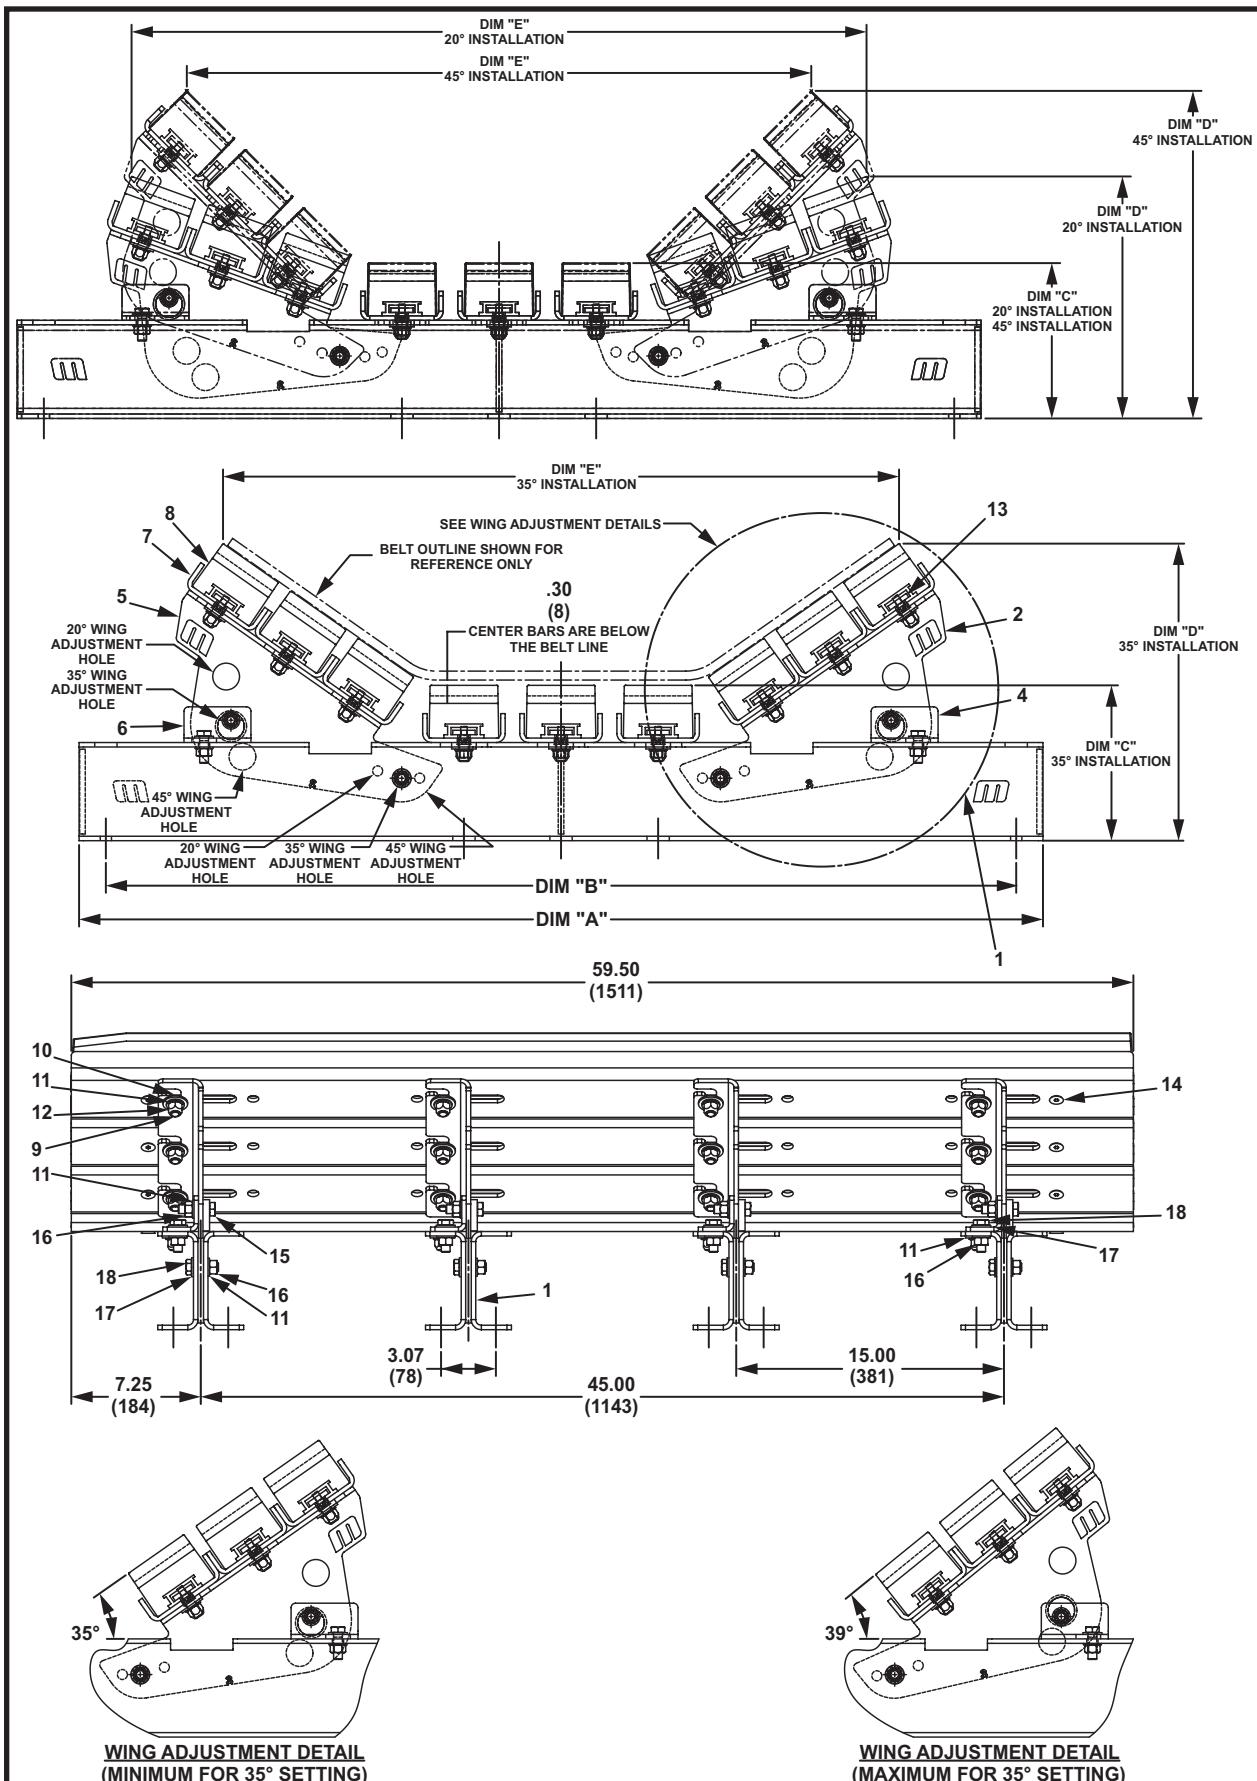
Martin® Impact Cradle MD Assembly with 5 ft. Bars, P/N 36516-XXX (Sheet 1 of 2)
